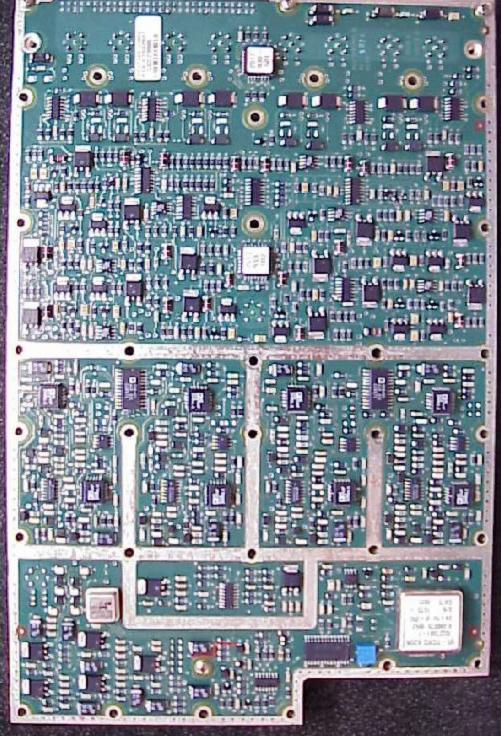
View of A5 Receiver – I/O Assembly with Shield Removed. Side A
